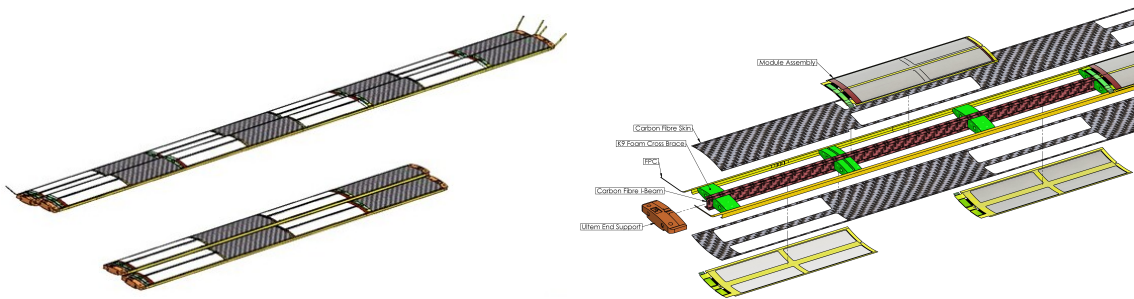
Left: OB staves for L3 and L4. Two staves per layer are shown. Right: Exploded view of an OB stave.
